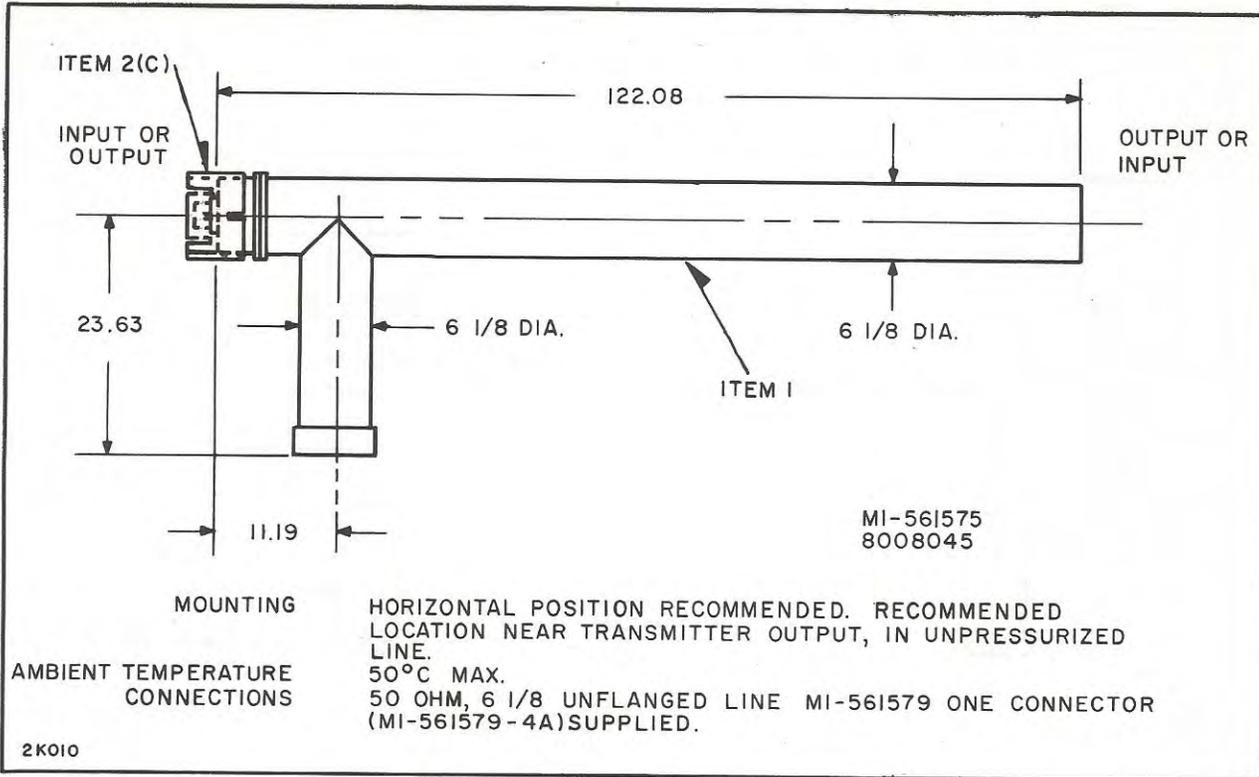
40 kW Harmonic Filter, Unpressurized, with Item 2 (C) Coupling Attached, Outline Drawing
